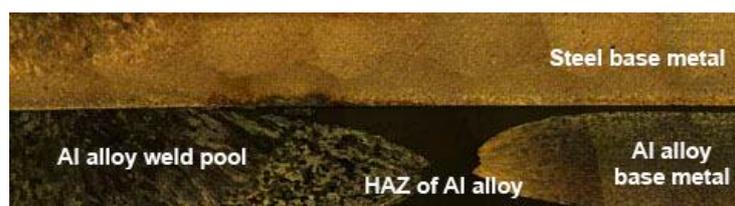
Fractured part in TIG joint welded using 28.5 kJ of heat input.
